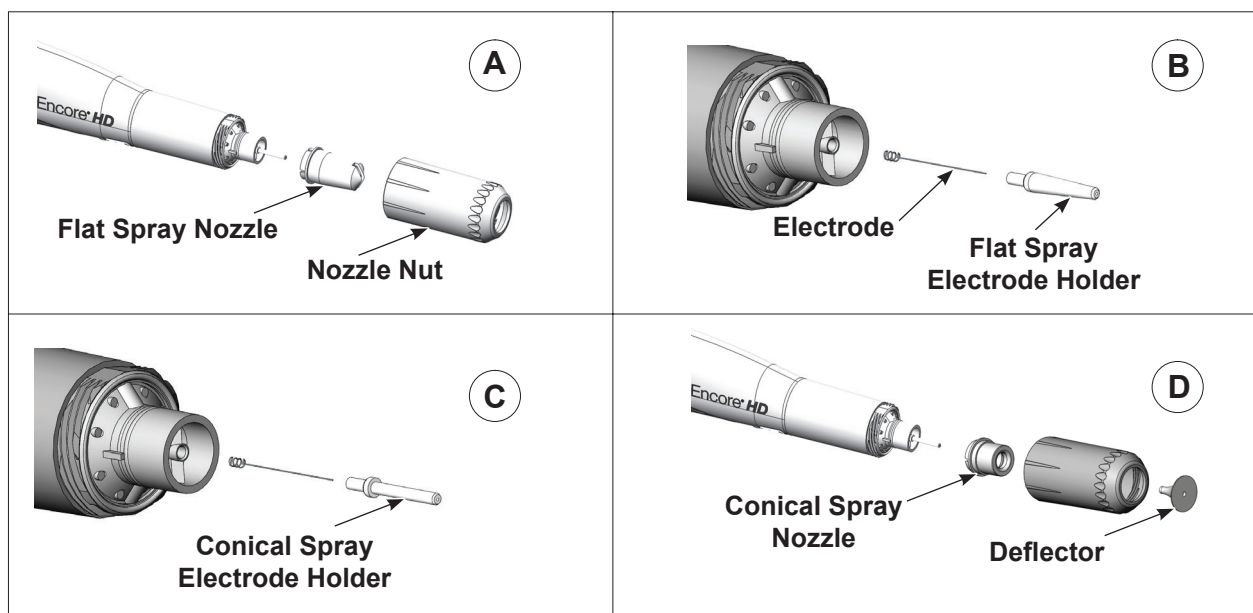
Converting from a Flat Spray Nozzle to a Conical Spray Nozzle
